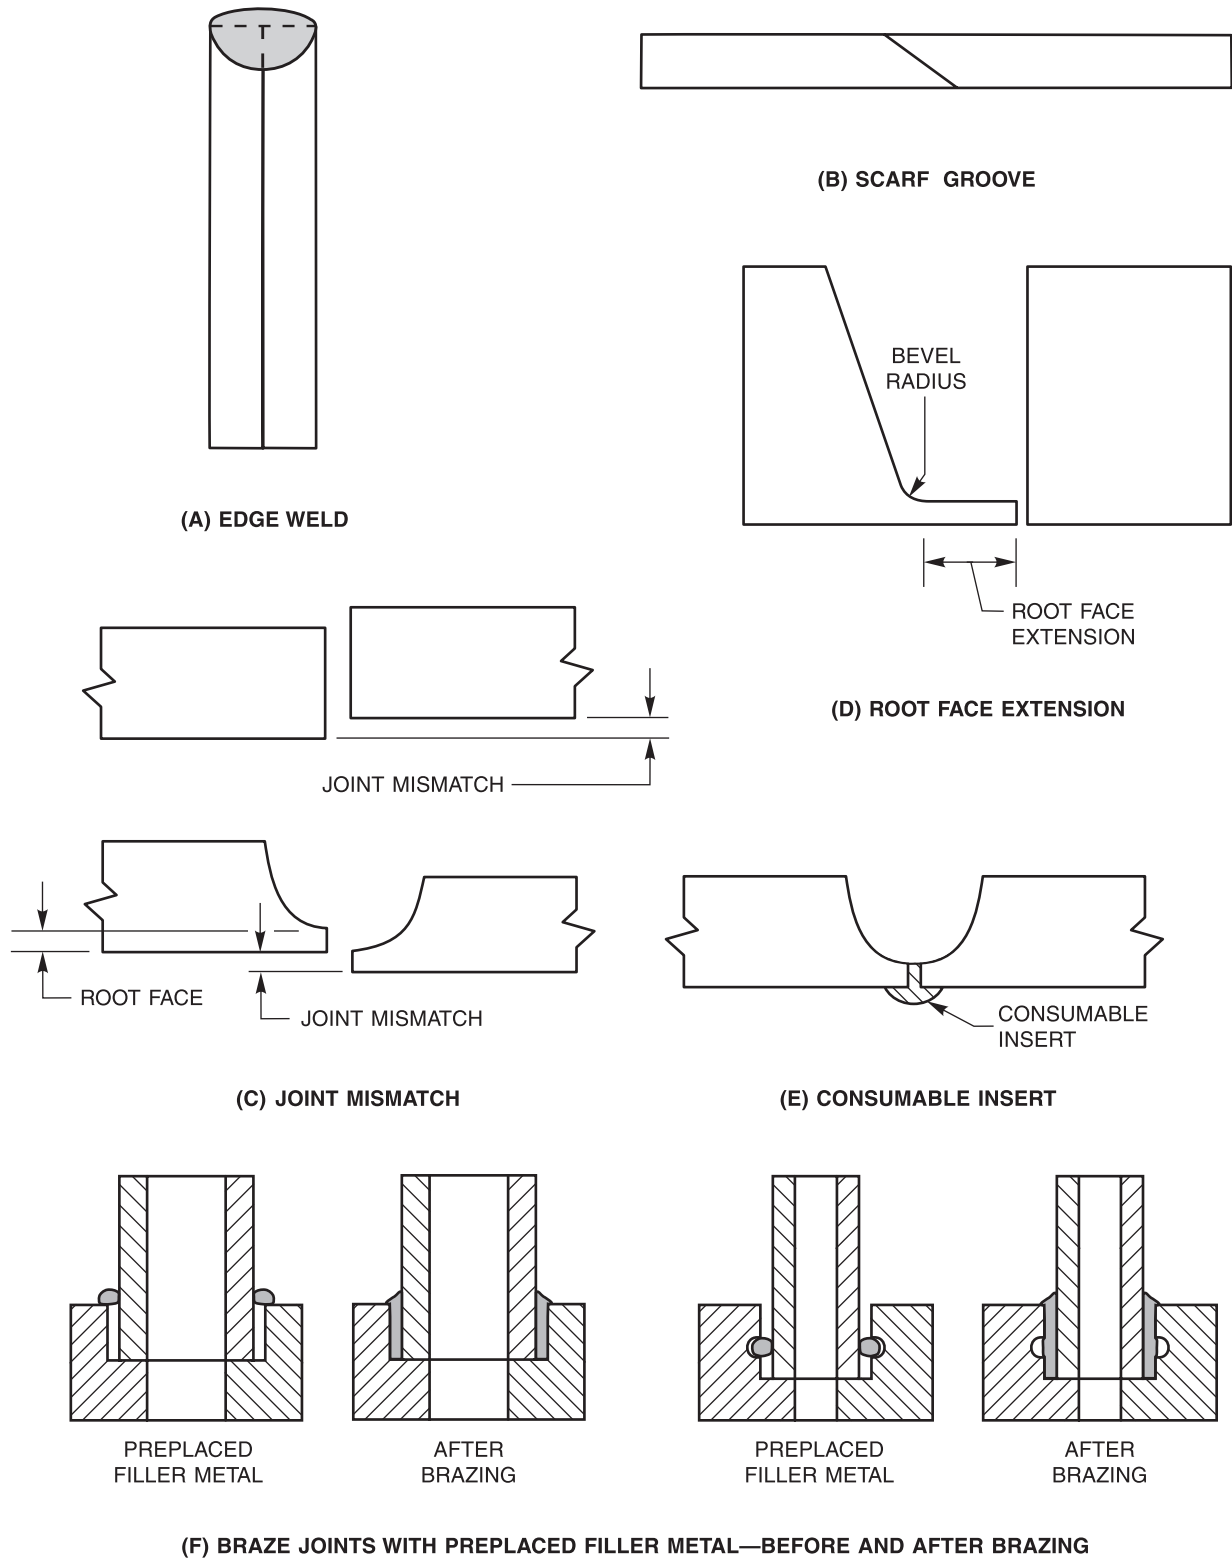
Edge Weld, Scarf Groove, Joint Mismatch, Root Face Extension, Consumable Insert, and Preplaced Filler Metal in a Brazed Joint
